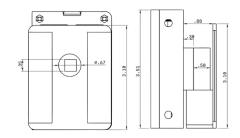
Initial prototype and dimensions of the back-view perspective of the door mount (left) and side-view perspective of the assembly (right). The door mount contains an opening for a peephole, a square design, and an area for the Raspberry Pi enclosure to attach to the door mount. The assembly consists of the door mount, camera enclosure, camera enclosure slot, and an open-sourced Raspberry Pi enclosure to house the Raspberry Pi.
